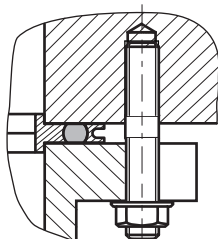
Flange connection ISO-F, hexagon head screw and tapped hole
